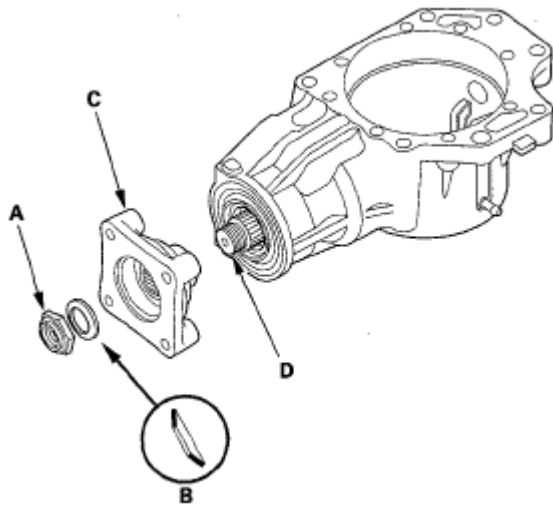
Identifying Locknut, Conical Spring Washer And Companion Flange
